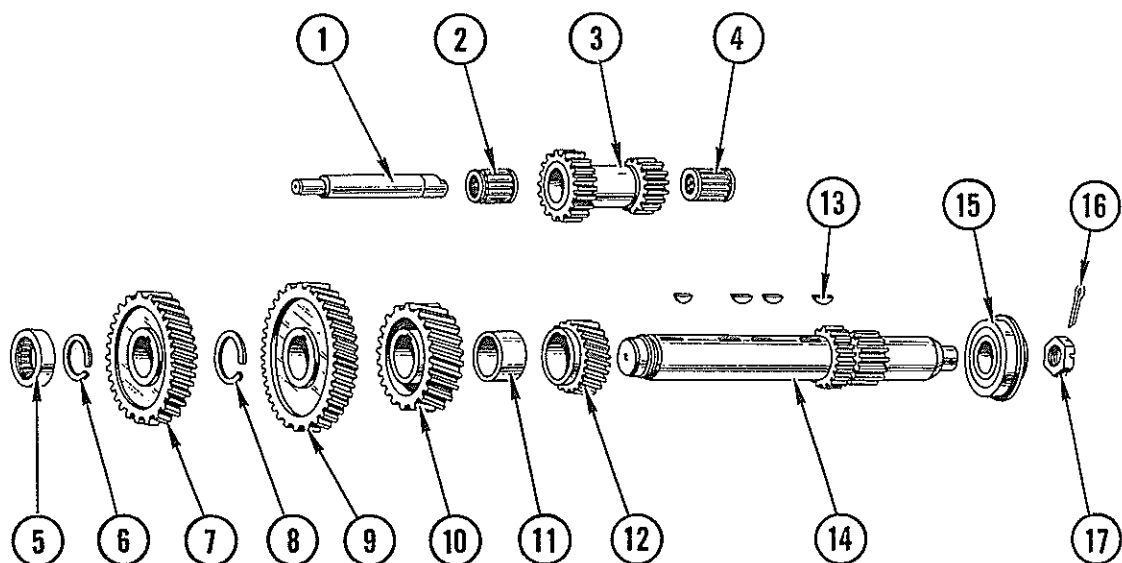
COUNTERSHAFT AND REVERSE IDLER GEARING
